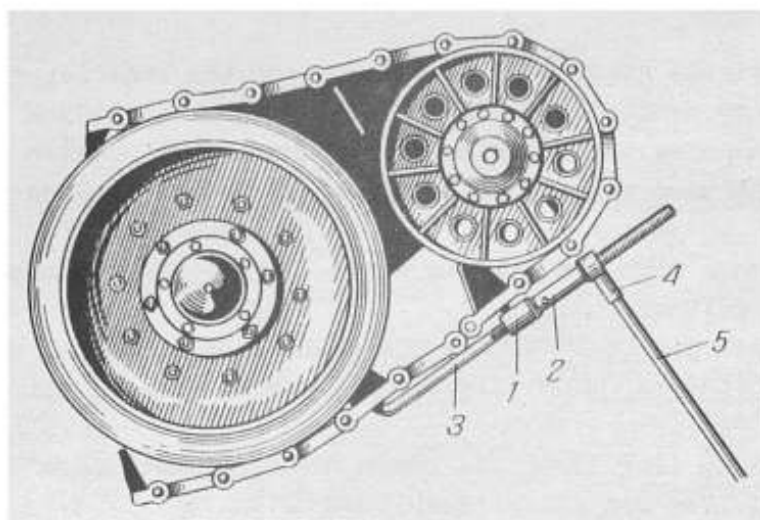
CONNECTING THE TRACK BY MEANS OF FIXTURE 11-00
